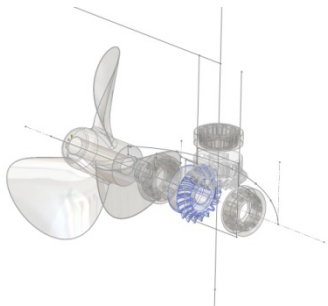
CADD of Chosen Spiral Bevel Gear Assembly
